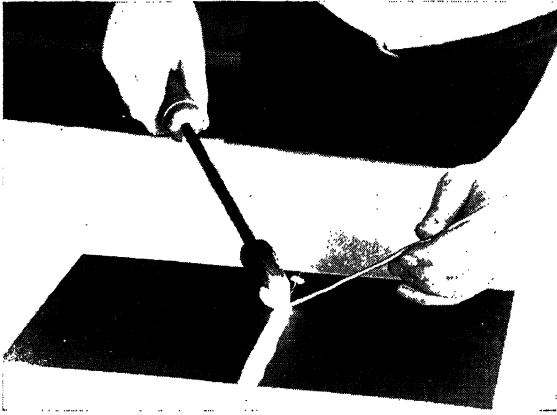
Feeding solder to the tacked seam as the copper moves along
